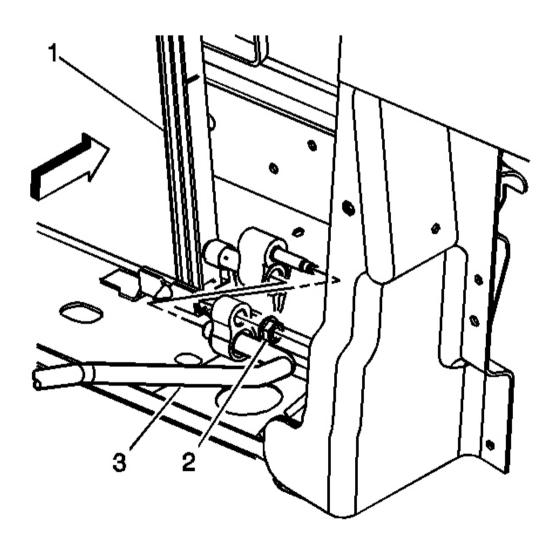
Evaporator Tube & Condenser Courtesy of GENERAL MOTORS CORP.
